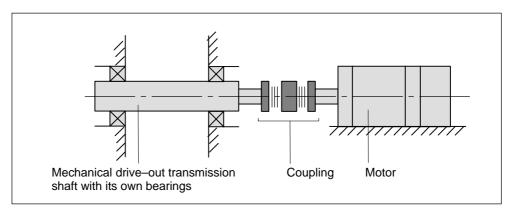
Mechanical drive–out transmission shaft with its own bearings and equalization coupling
